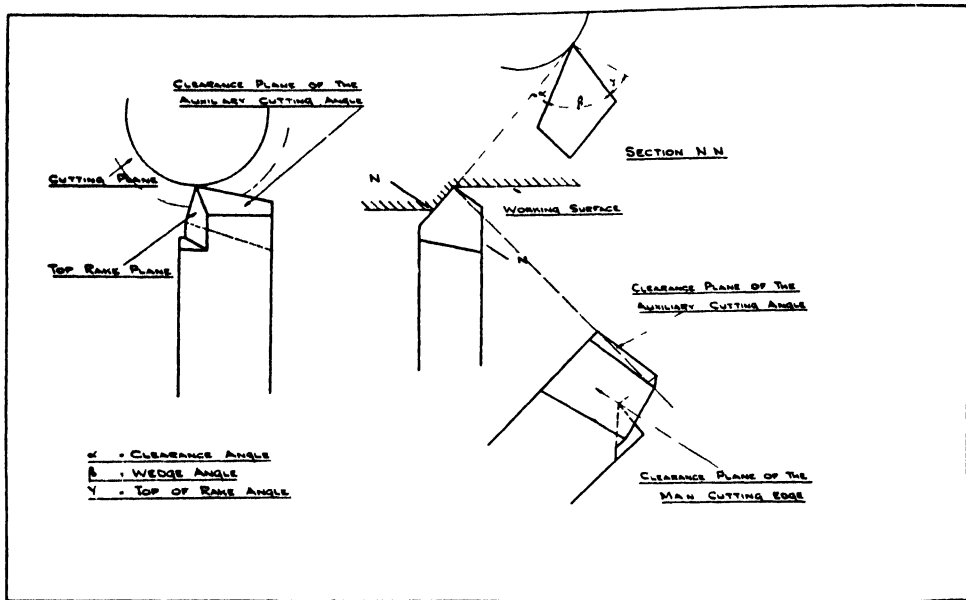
TOP RAKE, CLEARANCE, AND WEDGE ANGLES OF CUTTING TOOLS
